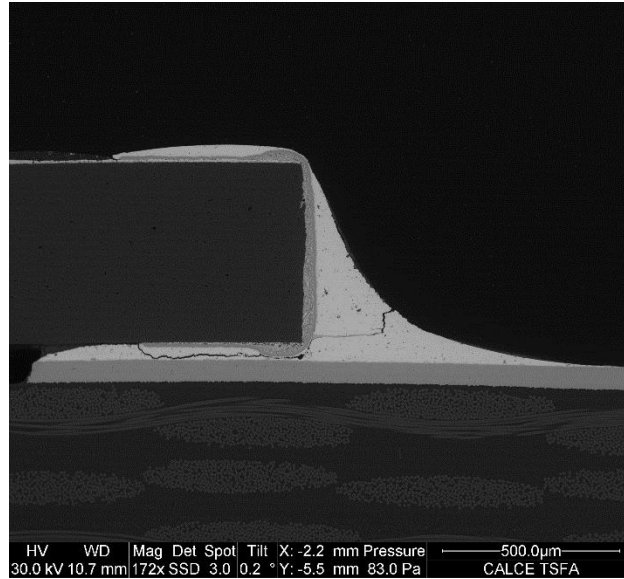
Solder Crack in R33 (Aged 100 Hours, Early Failure)
